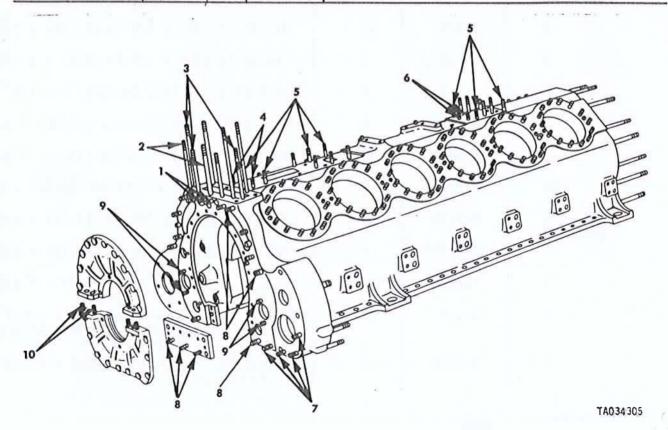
Crankcase studding - 3/4 left rear exploded view.
